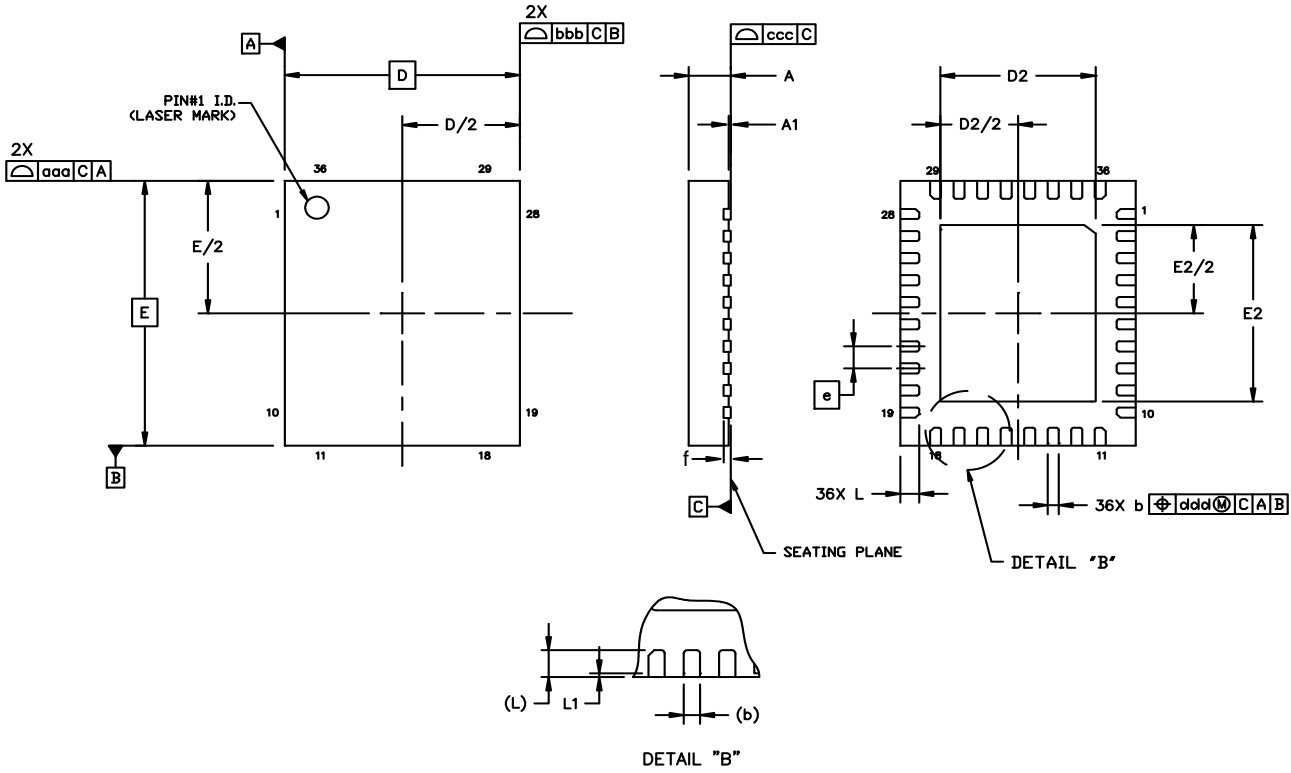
36-Pin Quad Flat No-Lead (QFN) Package
